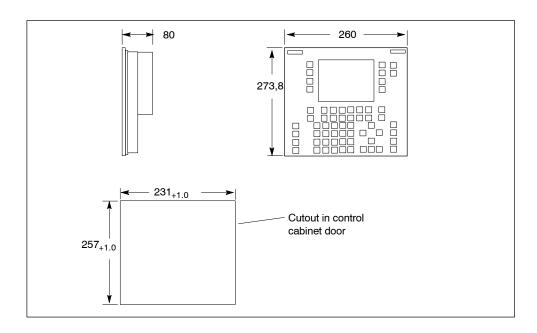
Dimension Drawings for the C7-635 Key (Measurements in mm)
